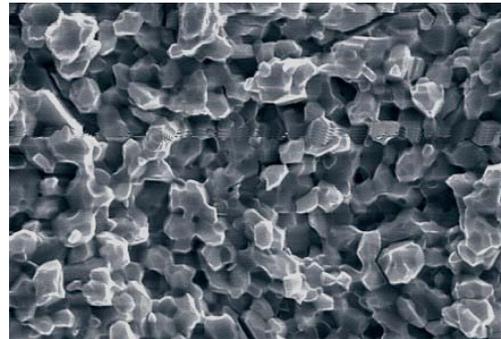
Fracture surface of a solder alloy wire of Zn-Al-Ga, after extrusion embrittled due to supersaturation that occurs in the fcc (Al) phase.
